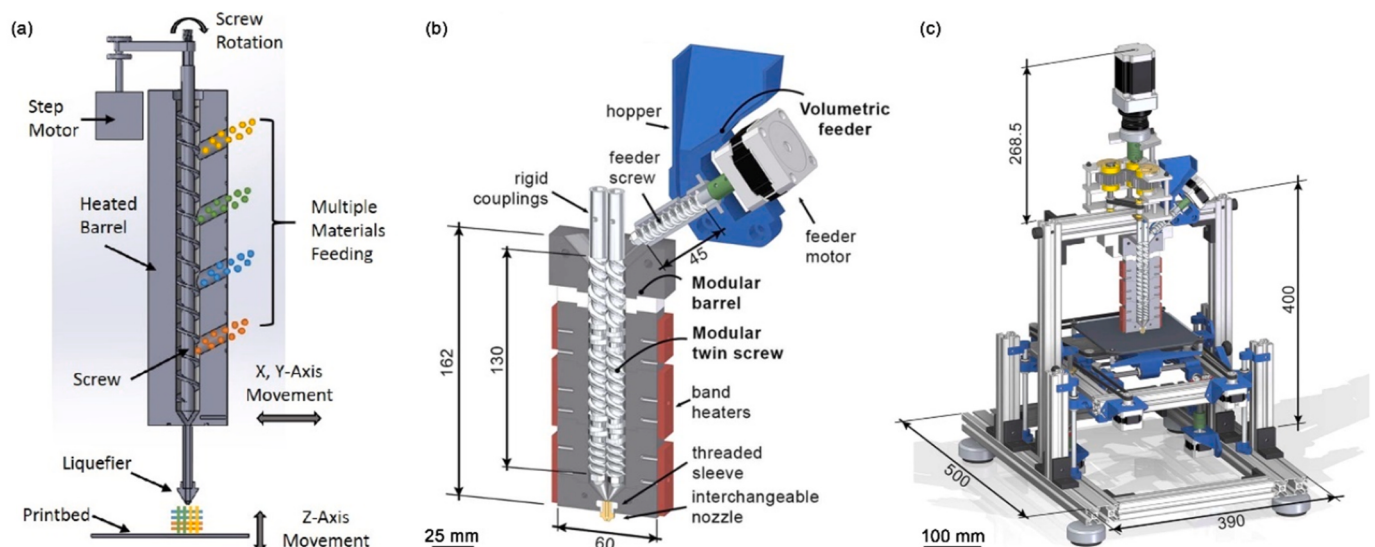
Schematic of multiple feeding port extruder (a), co-rotating twin screw extrusion head (b), and twin screw 3D printer (c) adopted from Refs. [40,70].
